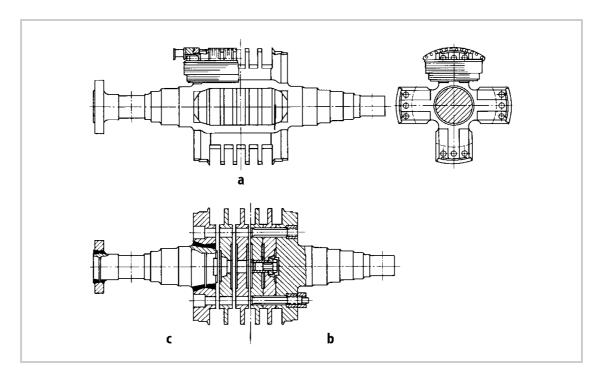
Rotor of a synchronous generator, after [7.8] (AEG-Telefunken): a as a forged part; b as a disc construction with forged flanges; c as for *b* but with welded flanges
